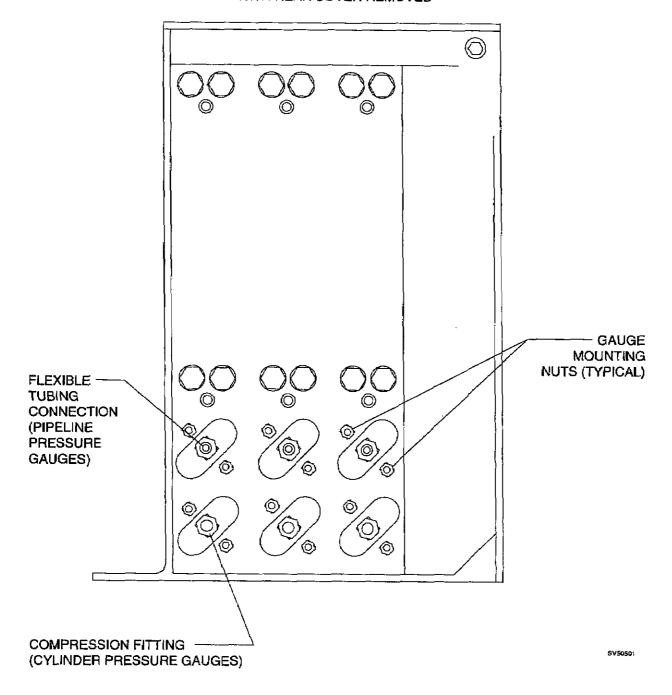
CYLINDER AND PIPELINE PRESSURE GAUGES
